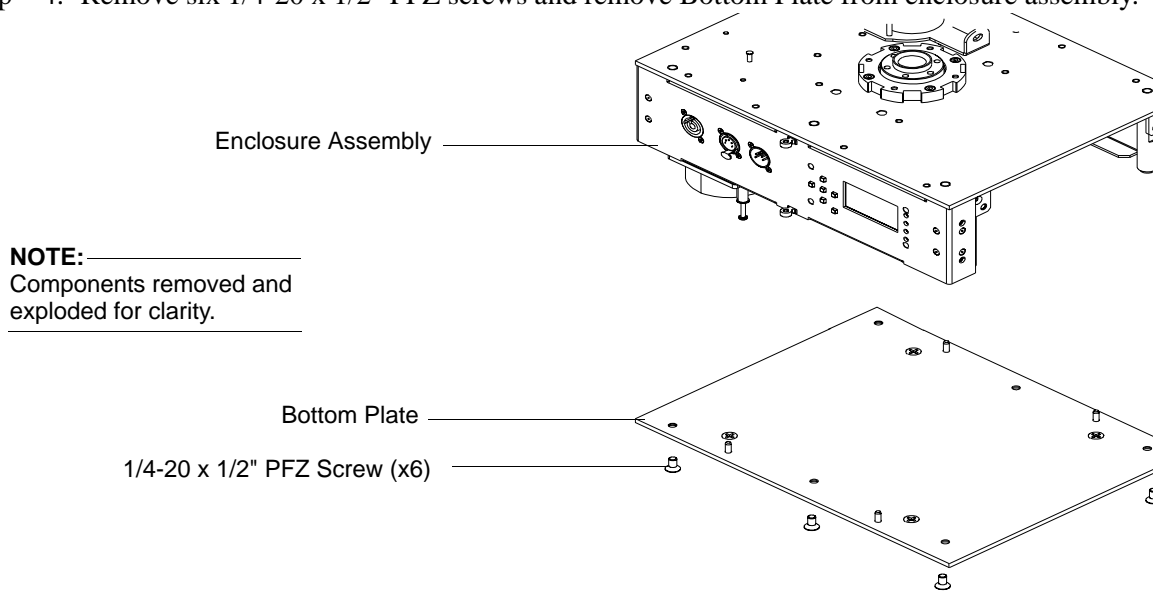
Enclosure Assembly Bottom Plate Removal
